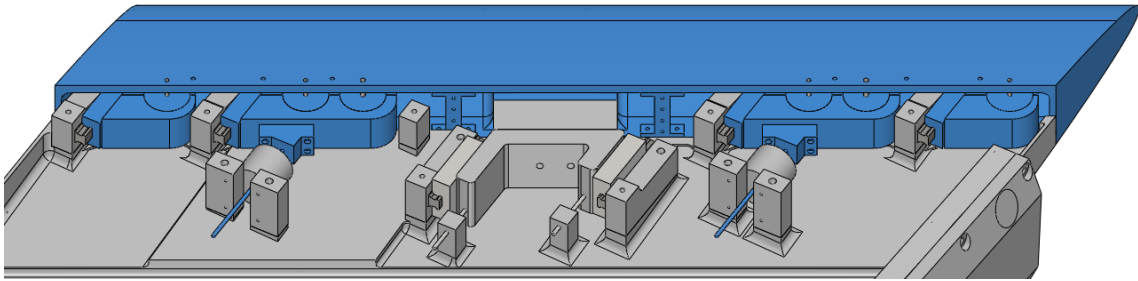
Fully bonded contact condition for leading-edge assembly (shaded blue)
